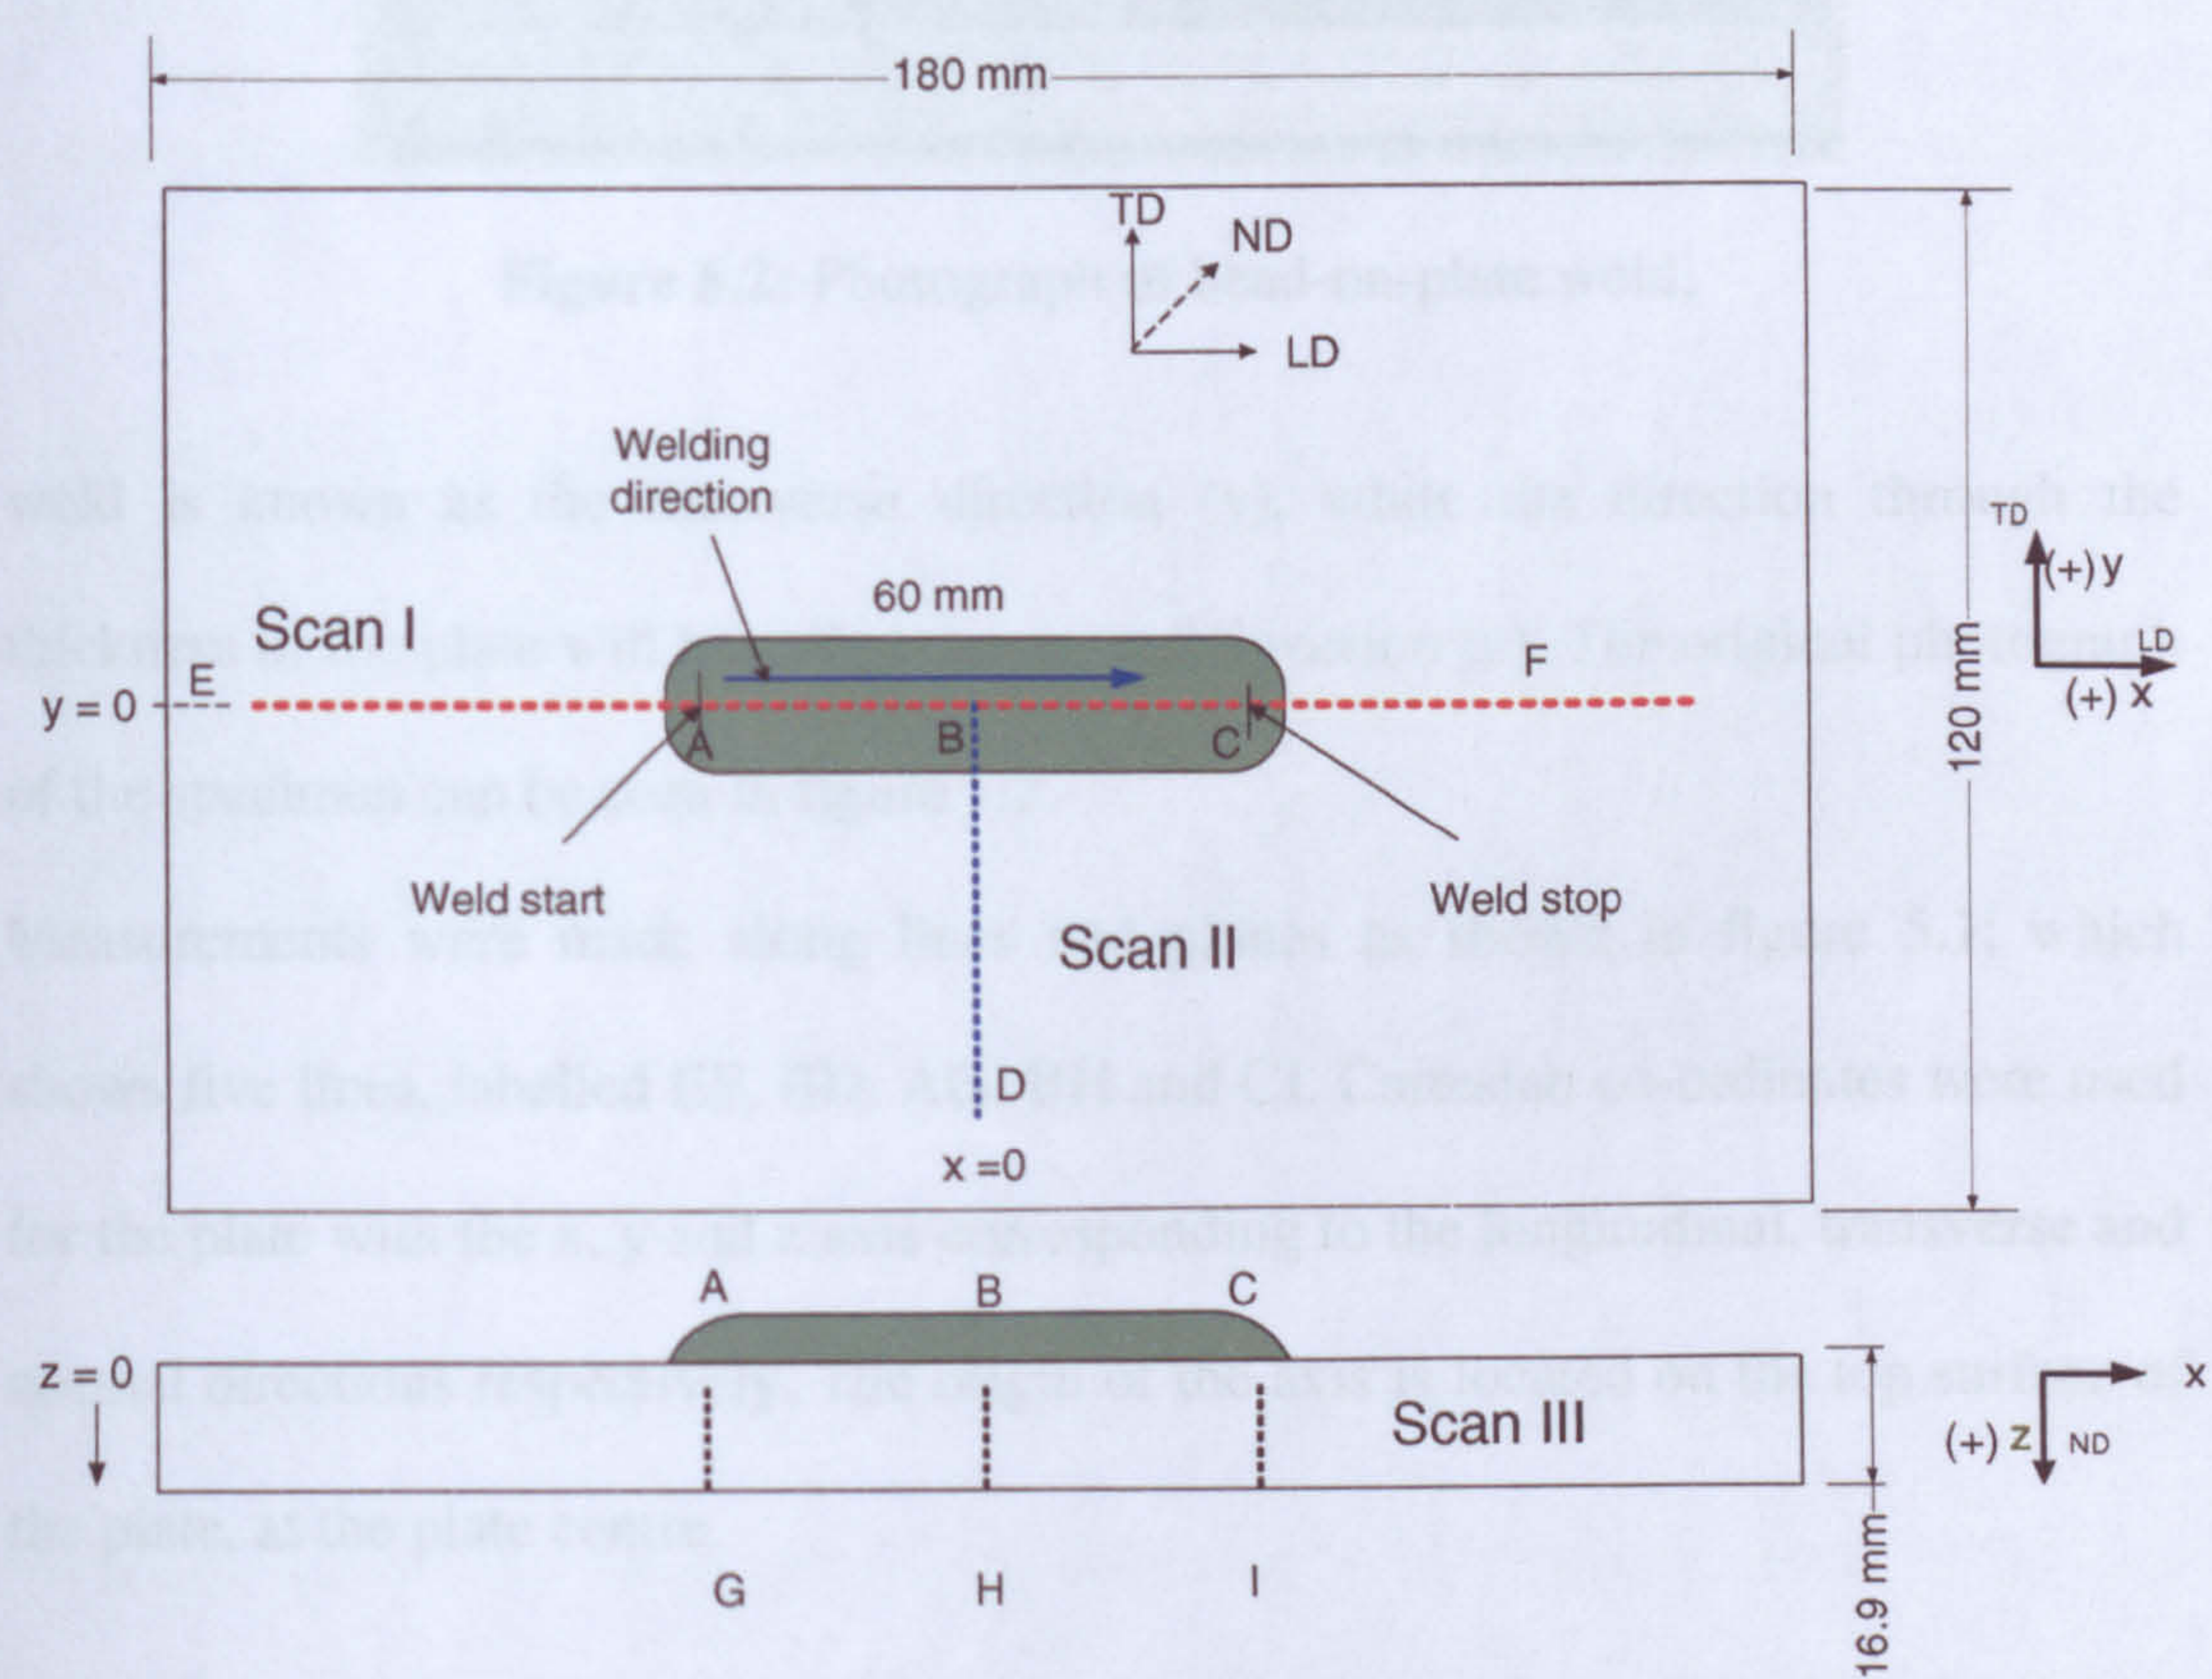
Schematic diagram of bead-on-plate weld.
